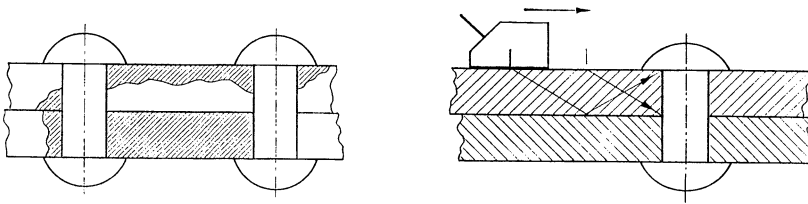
Partially and fully penetrating cracks in rivetted joints
